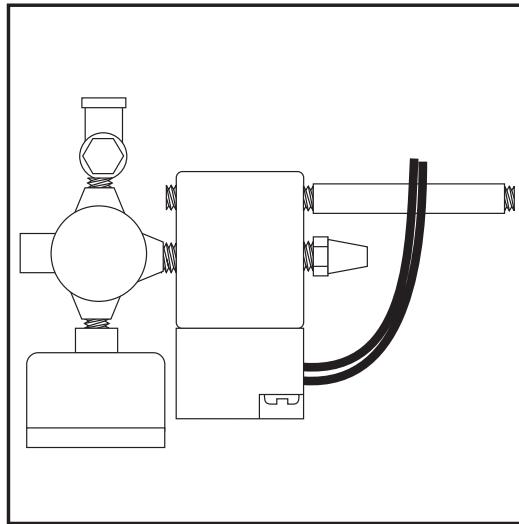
Top view of spindle lube/air solenoid assembly.
